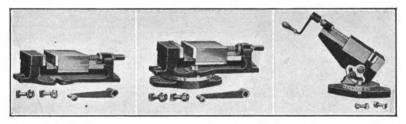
Fig. 47 Fig. 48 Figs. 46-48.—Milling machine vises.
